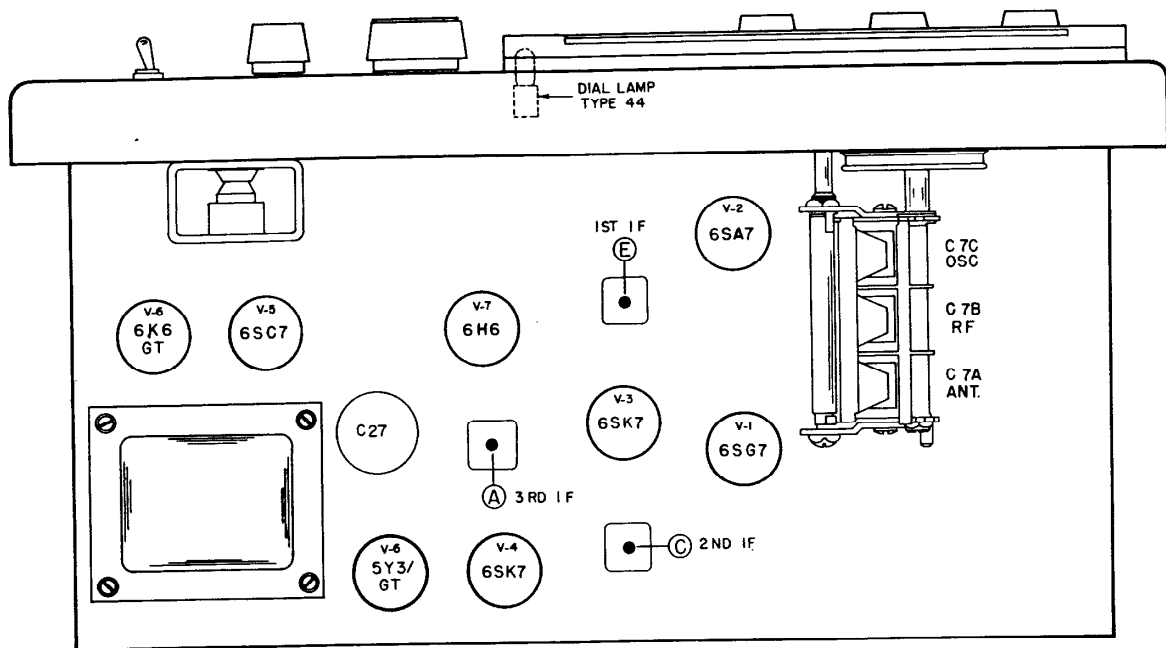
Top View of Chassis Showing Location of Alignment Adjustments, Tubes and Dial Lamp
